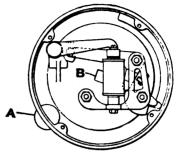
Details of Electro-Mechanical Spindle Slot.
